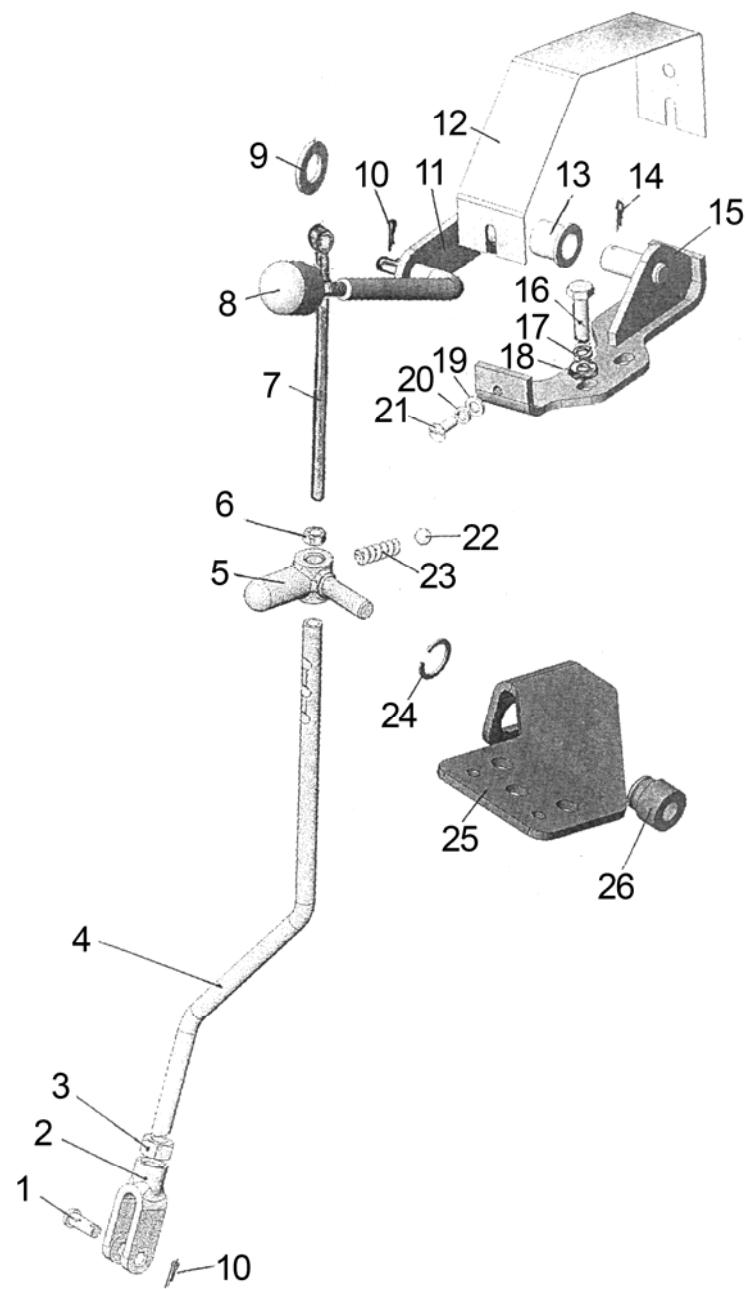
Transfer gearbox control (for two-lever gearbox control mechanism)
